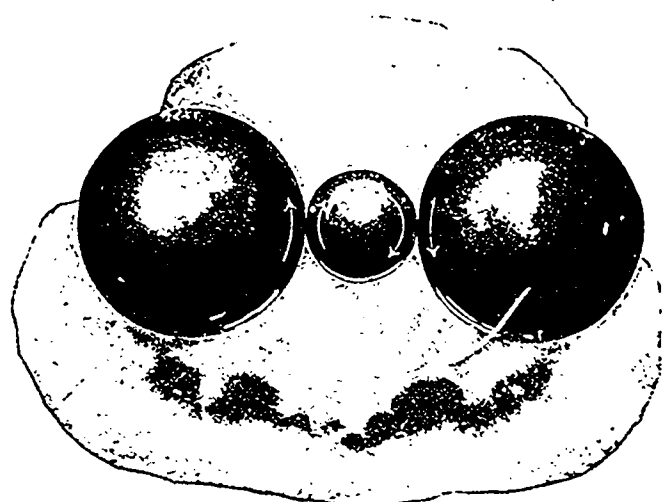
SHOWING THE PRINCIPLE OF THE CHAPMAN DOUBLE BALL BEARING.
